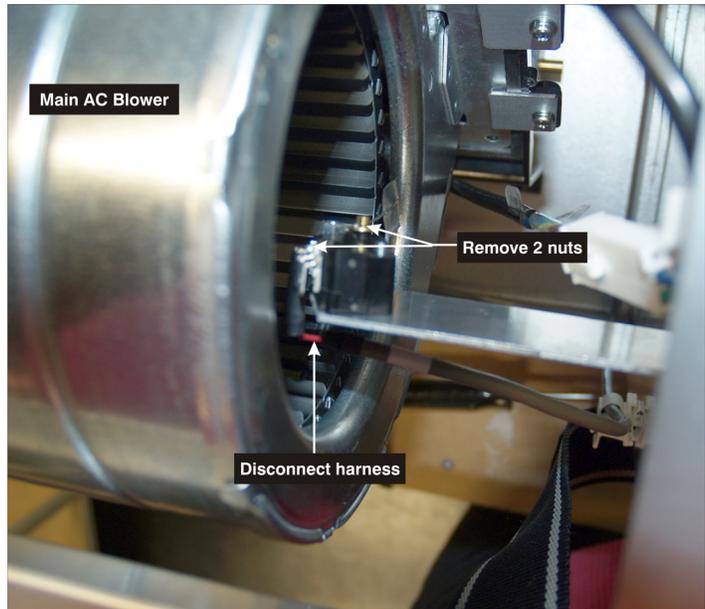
MAIN BLOWER VANE SWITCH
